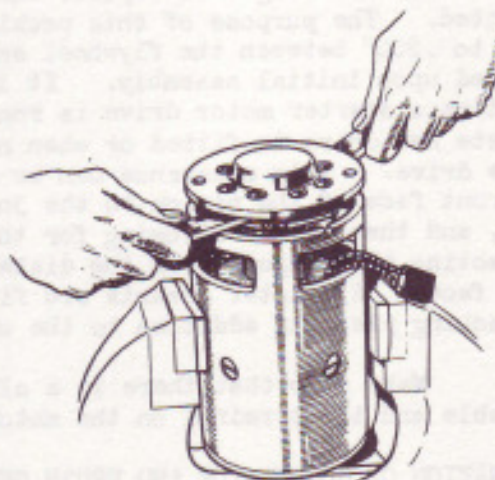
REMOVING COMMUTATOR END BRACKET.
